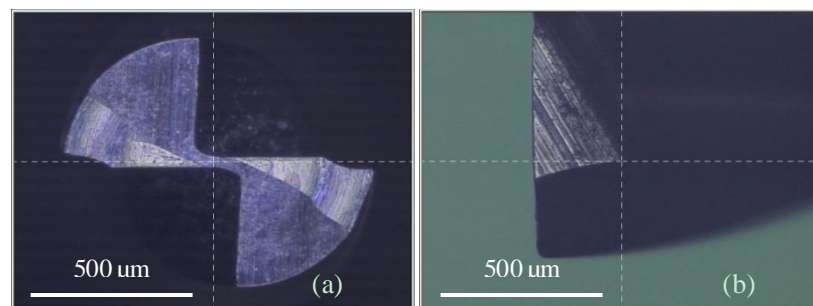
Step 1: tool wear after machining 3 meters in distance
